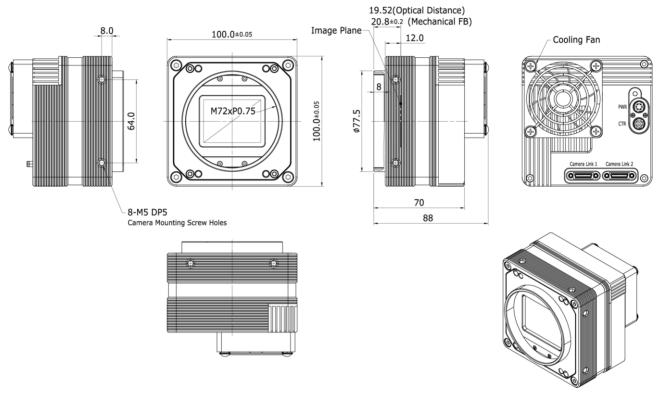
Mechanical Dimension for VP-101MC-8 M72-mount
